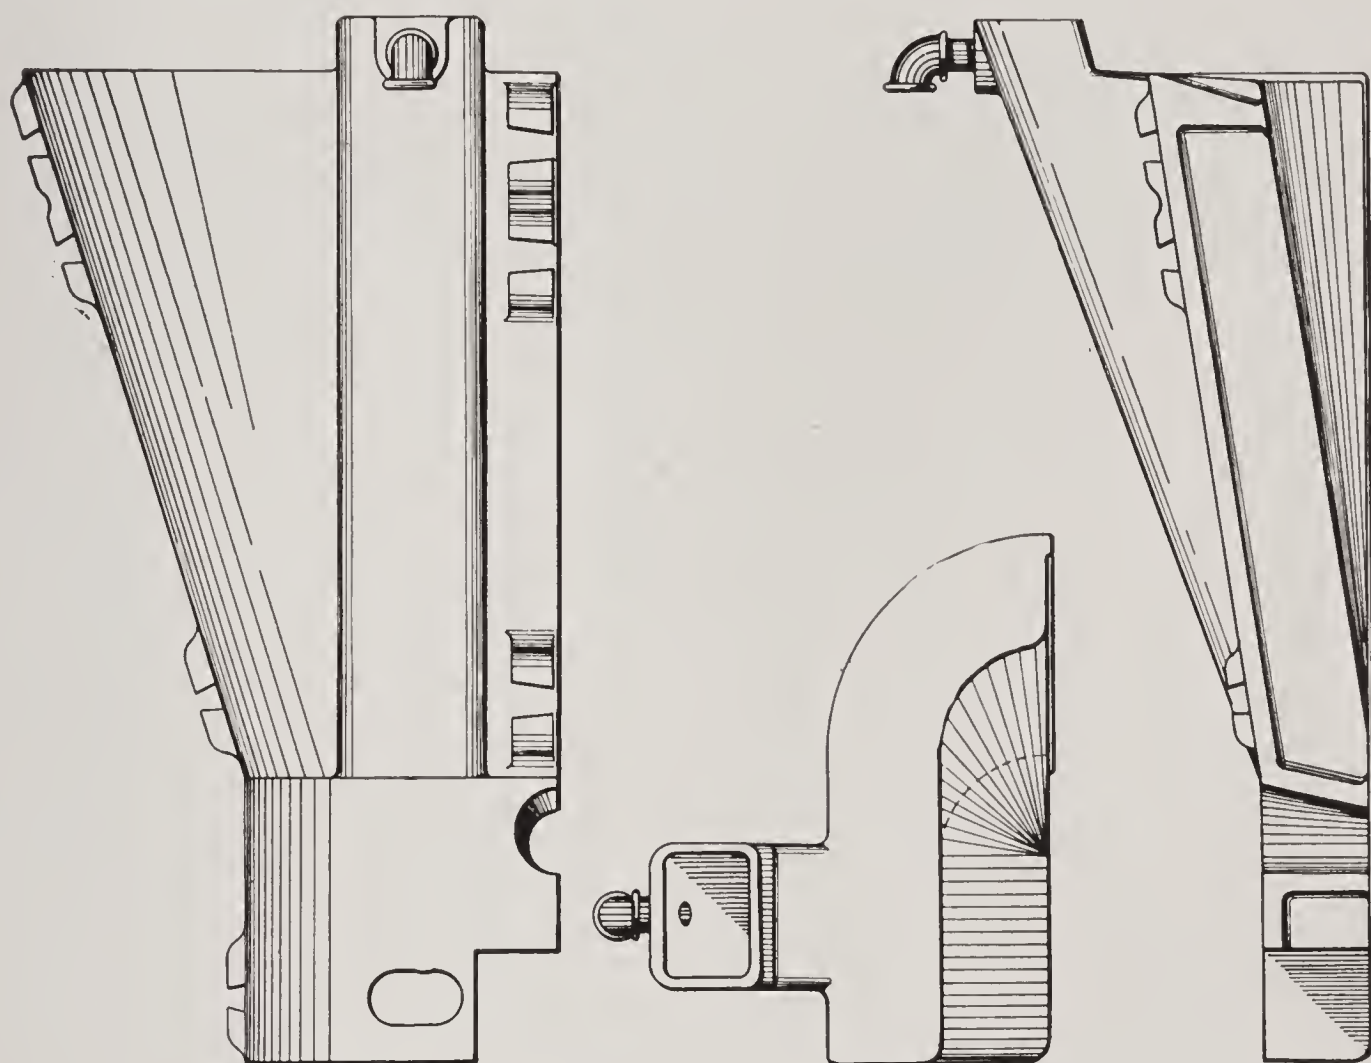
IMPROVED FORM OF CAST IRON CORNER JACKETS.
